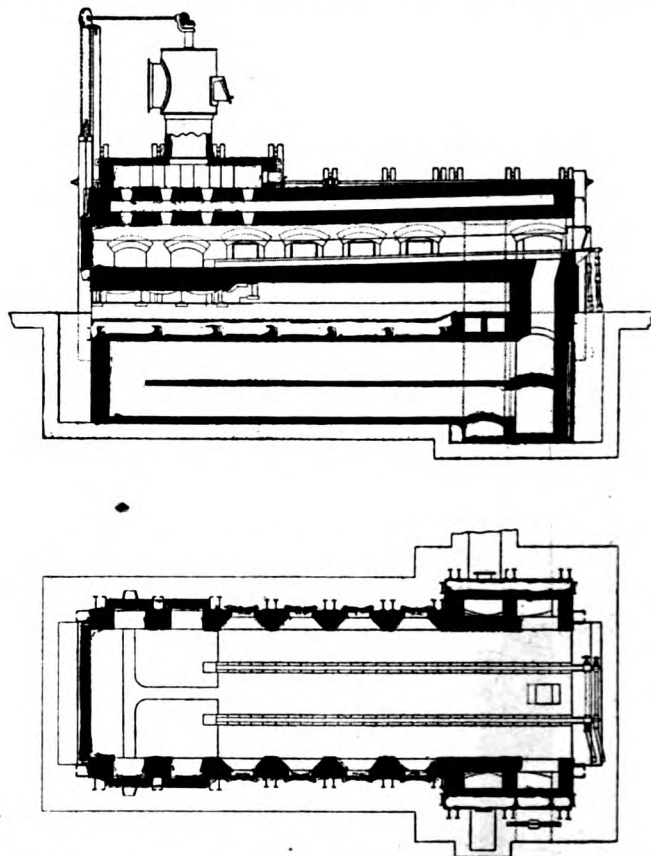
Continuous billet reheating furnace operated on producer gas.
